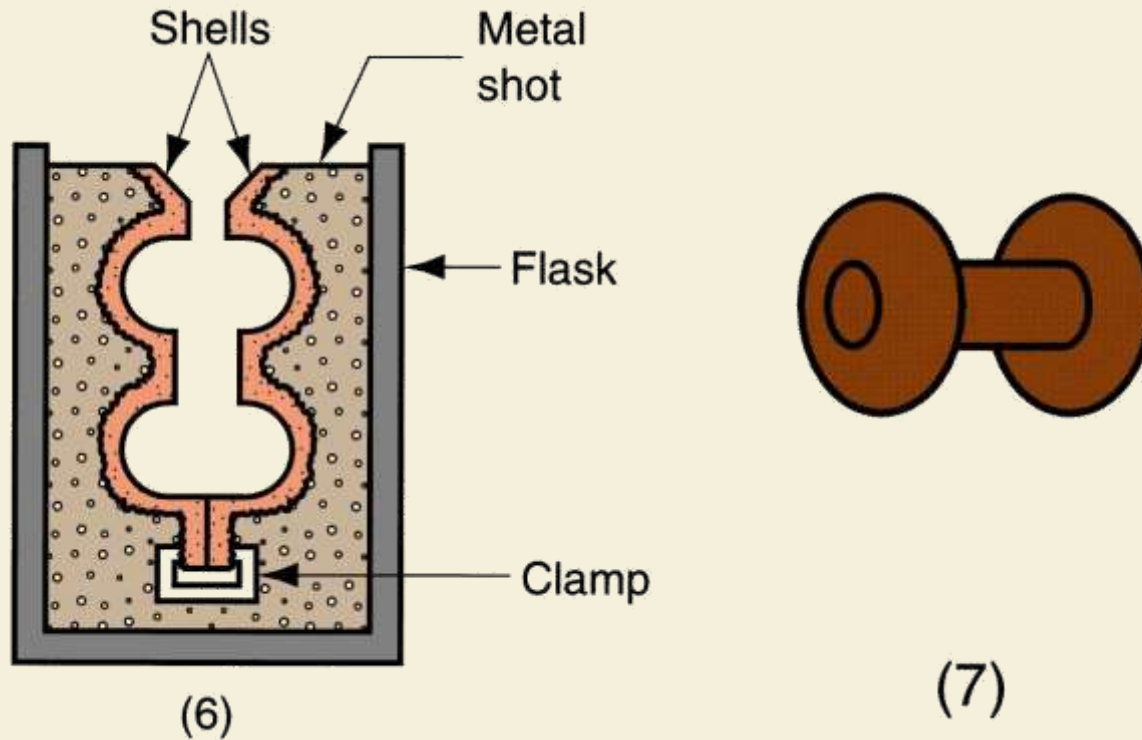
Steps in shell-molding: (6) two halves of the shell mold are assembled, supported by sand or metal shot in a box, and pouring is accomplished; (7) the finished casting with sprue removed.
